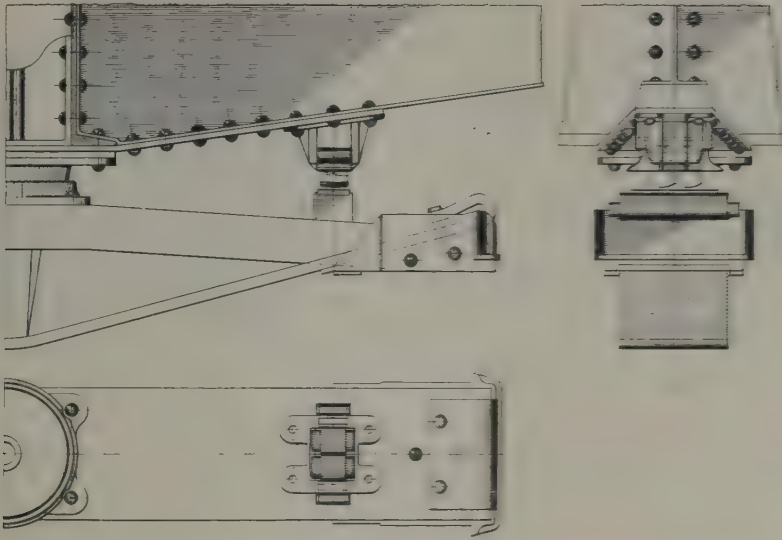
Tip Roller Side Bearing Applied to 50-Ton Capacity Freight Car. Edwin S. Woods & Company.
